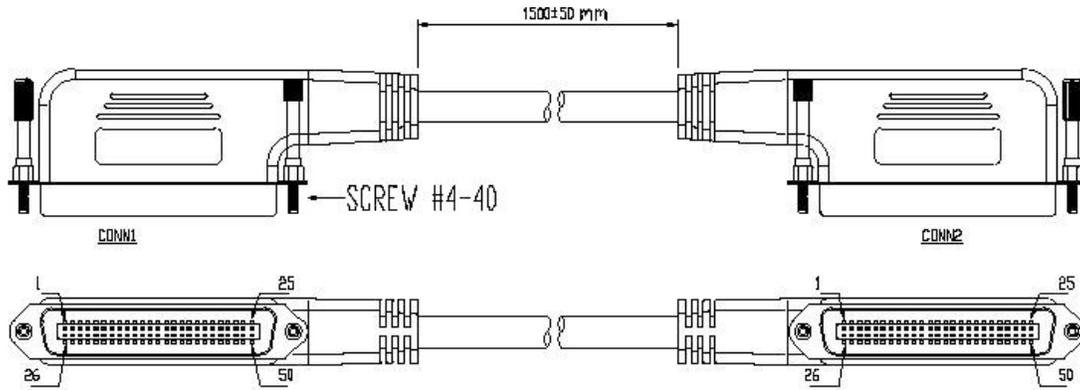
RJ-21 Cable Drawing (1500 cm Male to Male)
